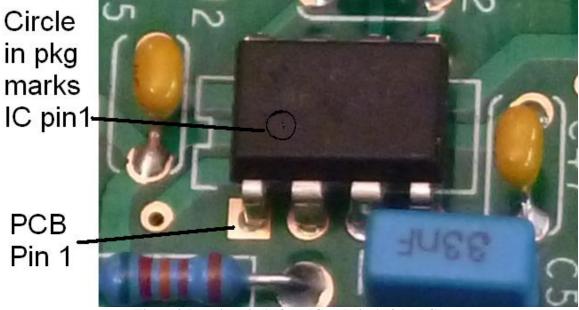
Locating pin 1 of the IC and pin 1 of the PCB
